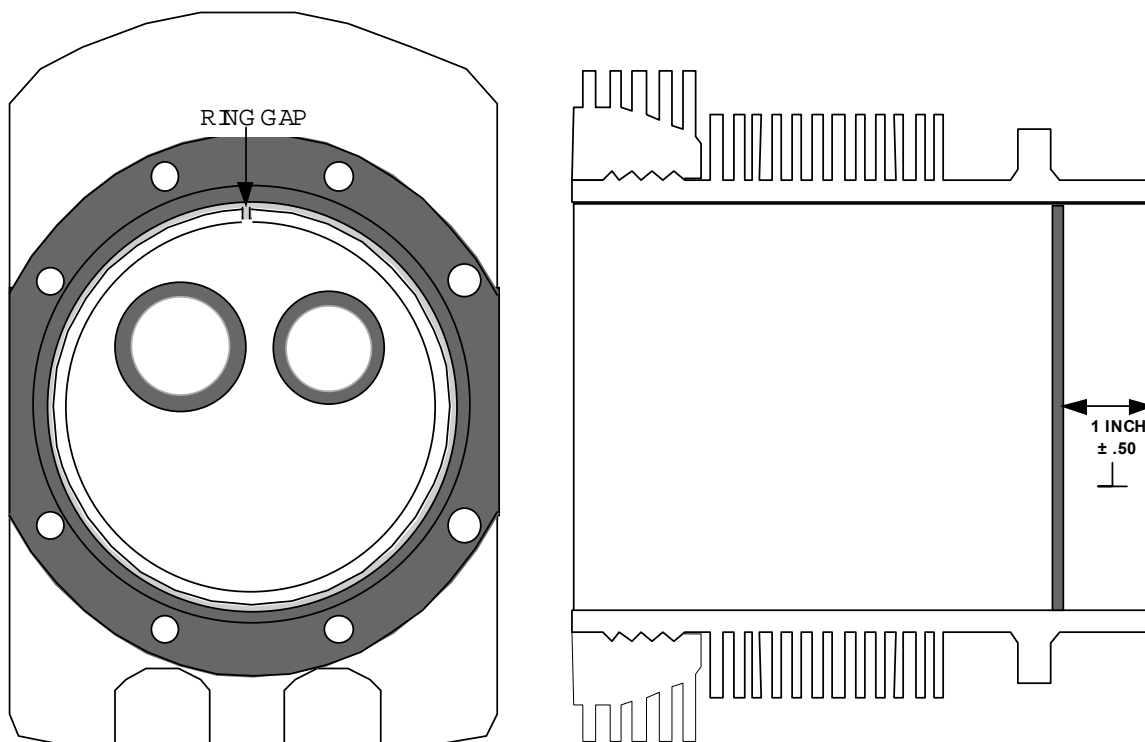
LOCATION FOR INSPECTING RING GAP
